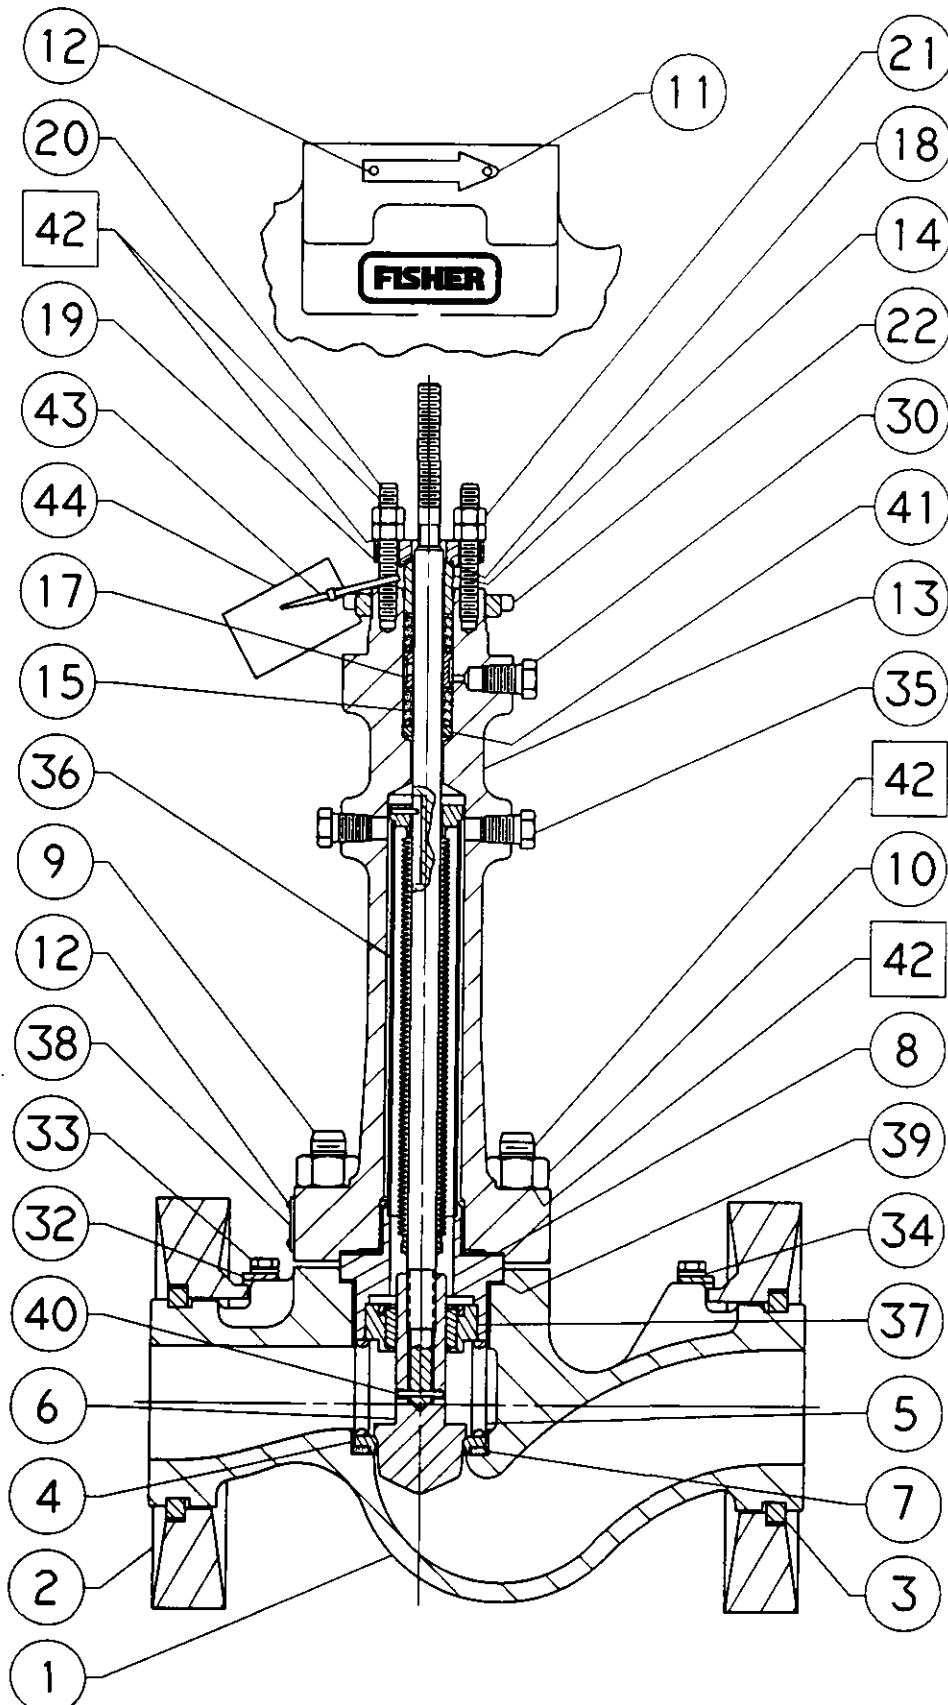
Design CE Valve with Enviro-Seal Stem/Bellows Assembly and Bonnet
